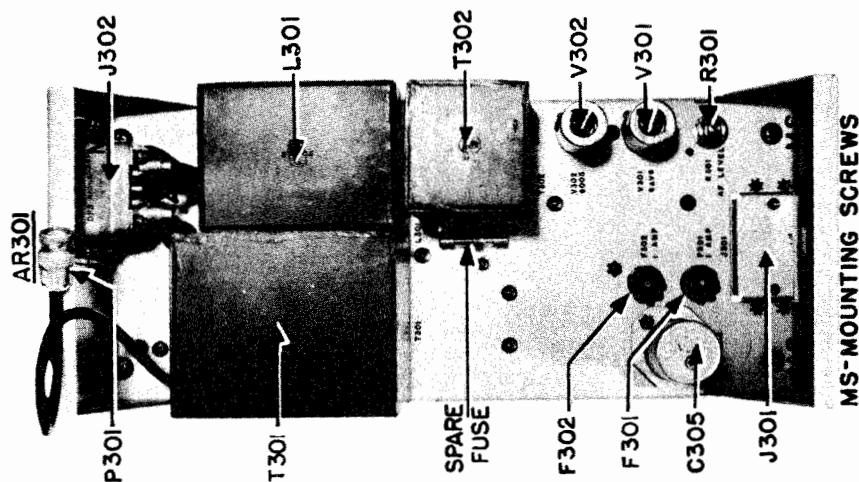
Audio-Power Supply Sub-Chassis, Top View
